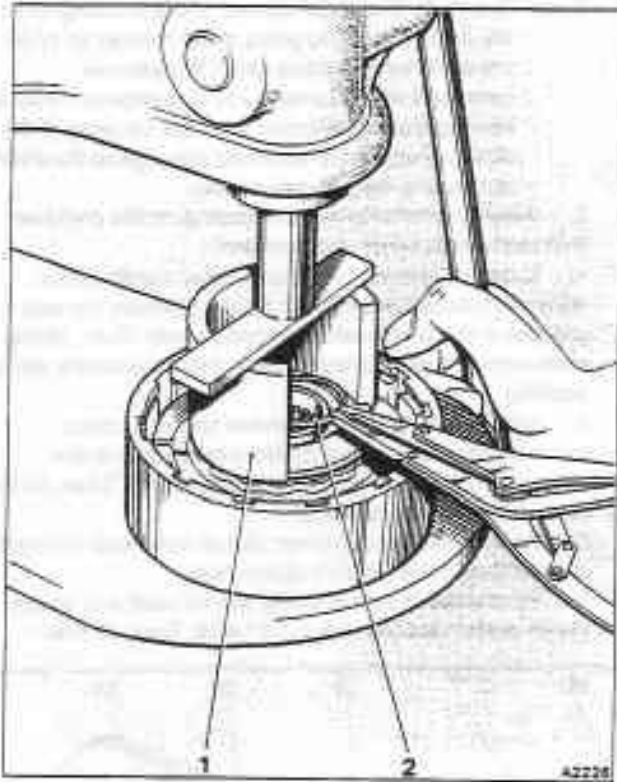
Removing and fitting the forward clutch housing snap ring
